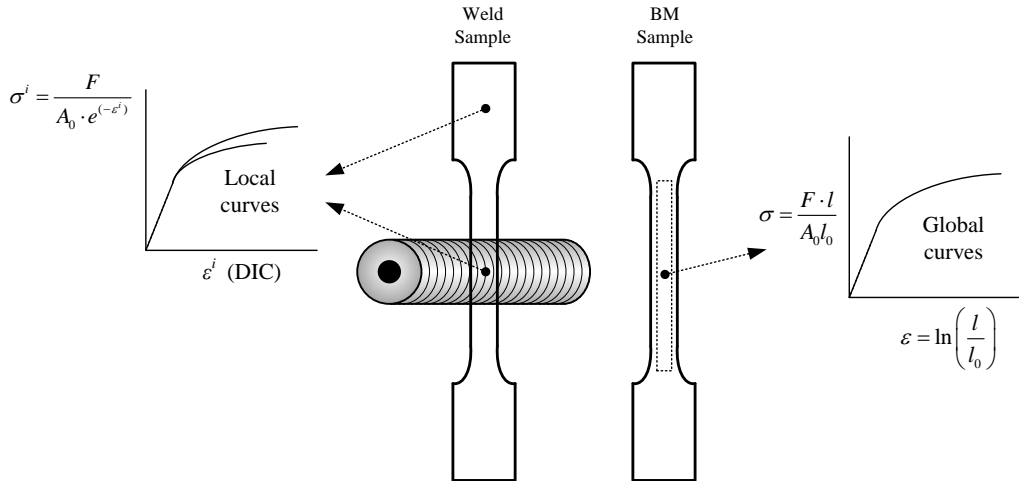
Base material and weld transverse tensile specimen scheme.
